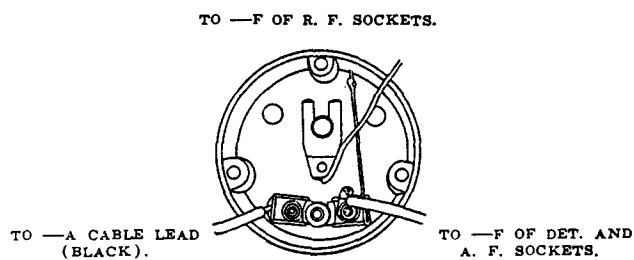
REAR VIEW OF RHEOSTAT AND FILAMENT SWITCH ASSEMBLY USED IN MODEL 35.
